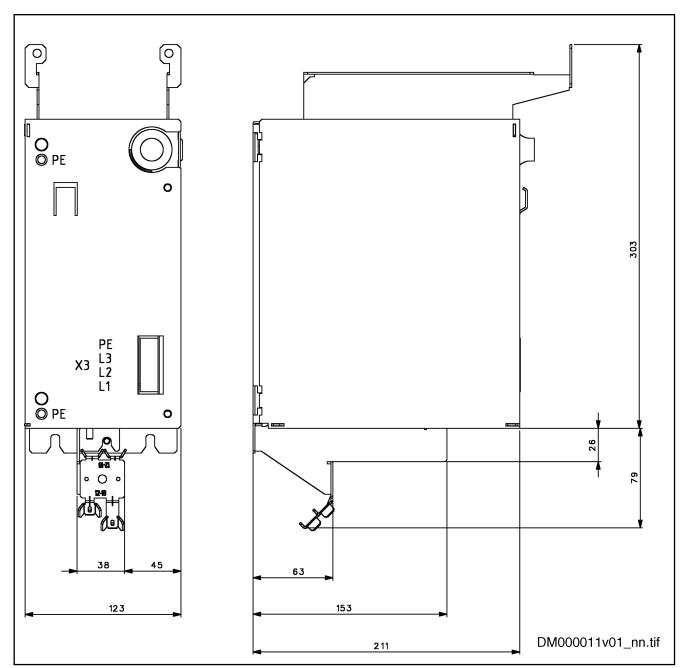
Mains filter dimensions HNK01.1A-A075-E0050 with HAS02
